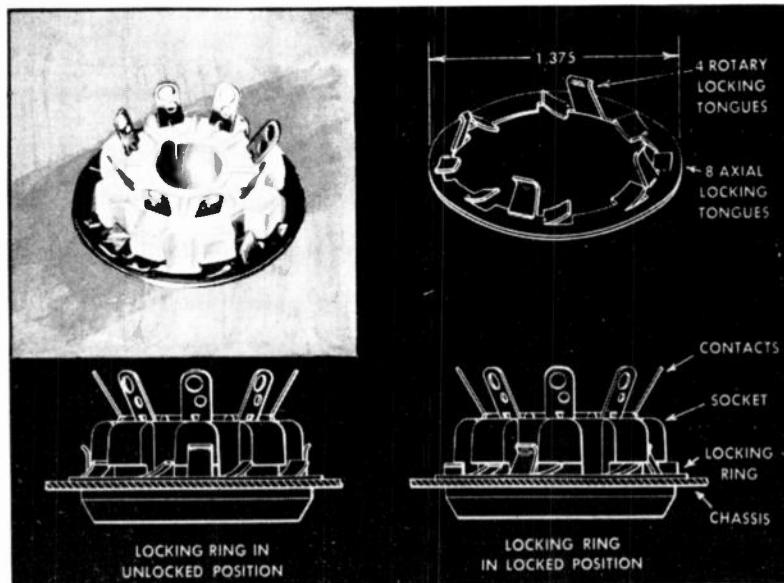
DETAILS OF THE FRANKLIN LOCKING RING FOR VACUUM TUBE SOCKETS
